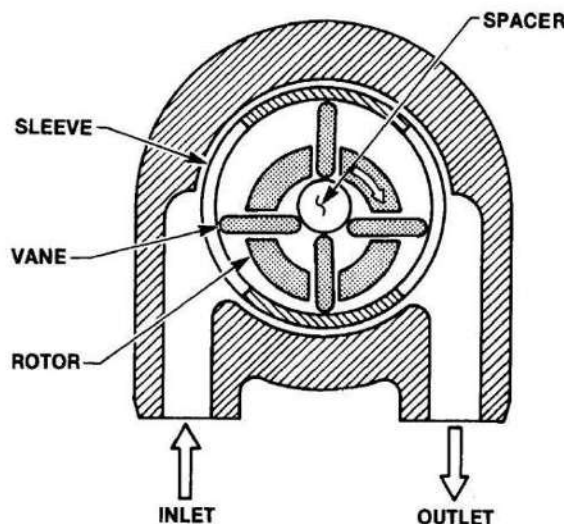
Vane-type Hydraulic Pump (Constant Volume Fixed Displacement)
